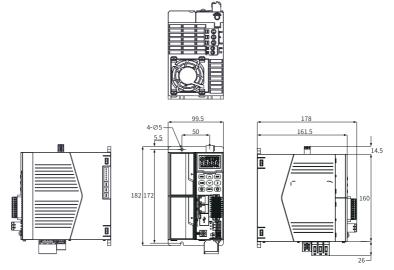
Overall and mounting dimensions of the power supply unit (unit: mm)
